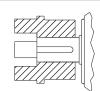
Place coupling flush with end of motor shaft and tighten setscrew.
